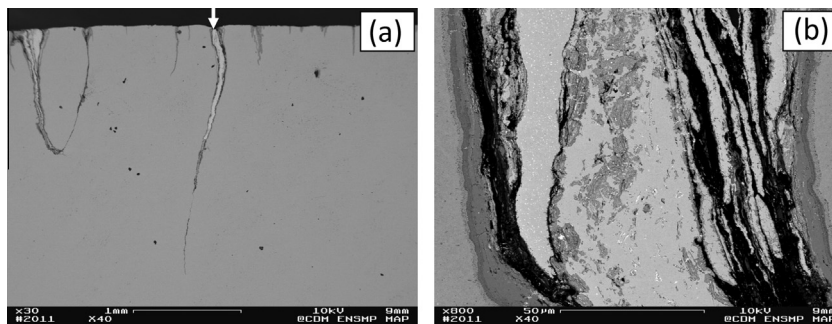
Polished cross-section of a steel mold: (a) overview revealing typical thermal fatigue cracks. (b) Close-up of the crack indicated by the arrow in (a).
